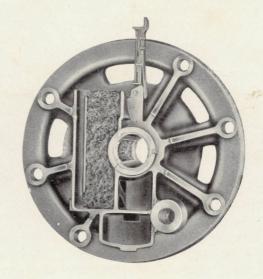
FRAME HEAD SECTION SHOWING METHOD OF LUBRICATING BEARINGS
